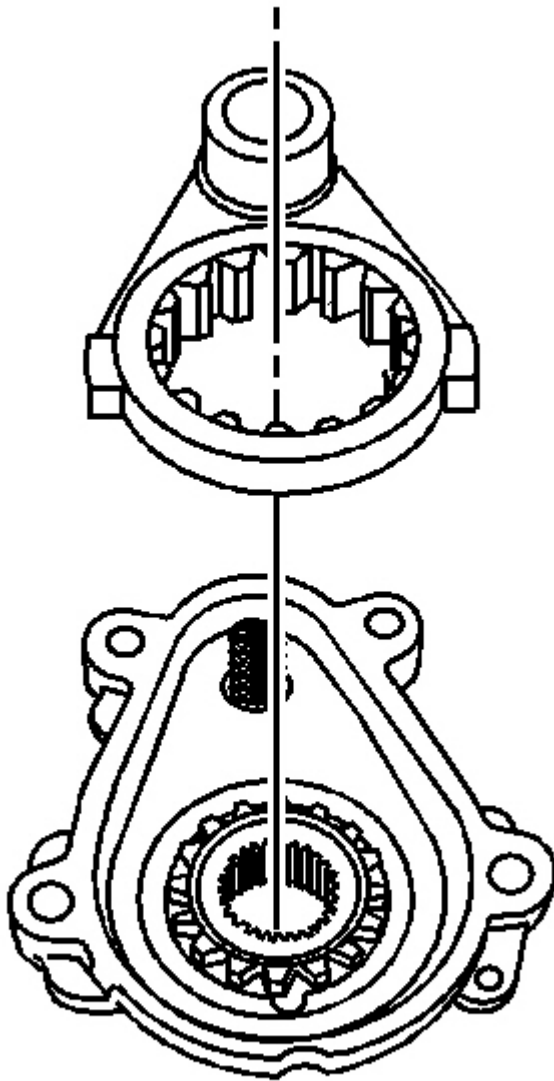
View Of Clutch Fork & Clutch Fork Sleeve
